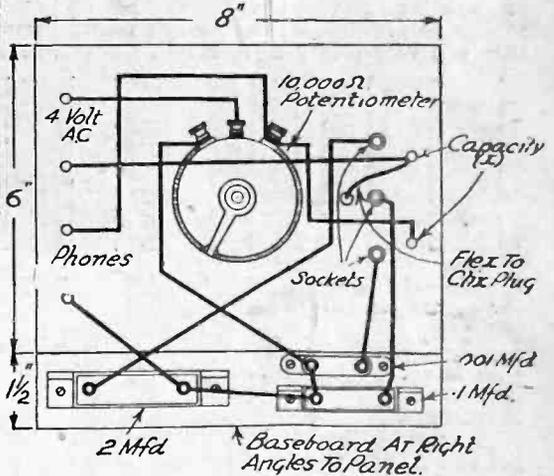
Sketch plan of lay-out and wiring diagram.
